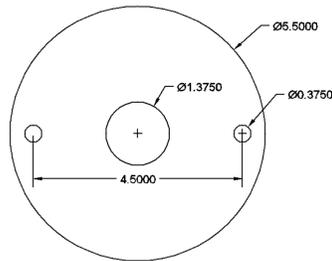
Shows the Plate design based on the stock PTO shaft mounting system on the PTO dyno which was fabricated and welded onto the new PTO Shaft.
